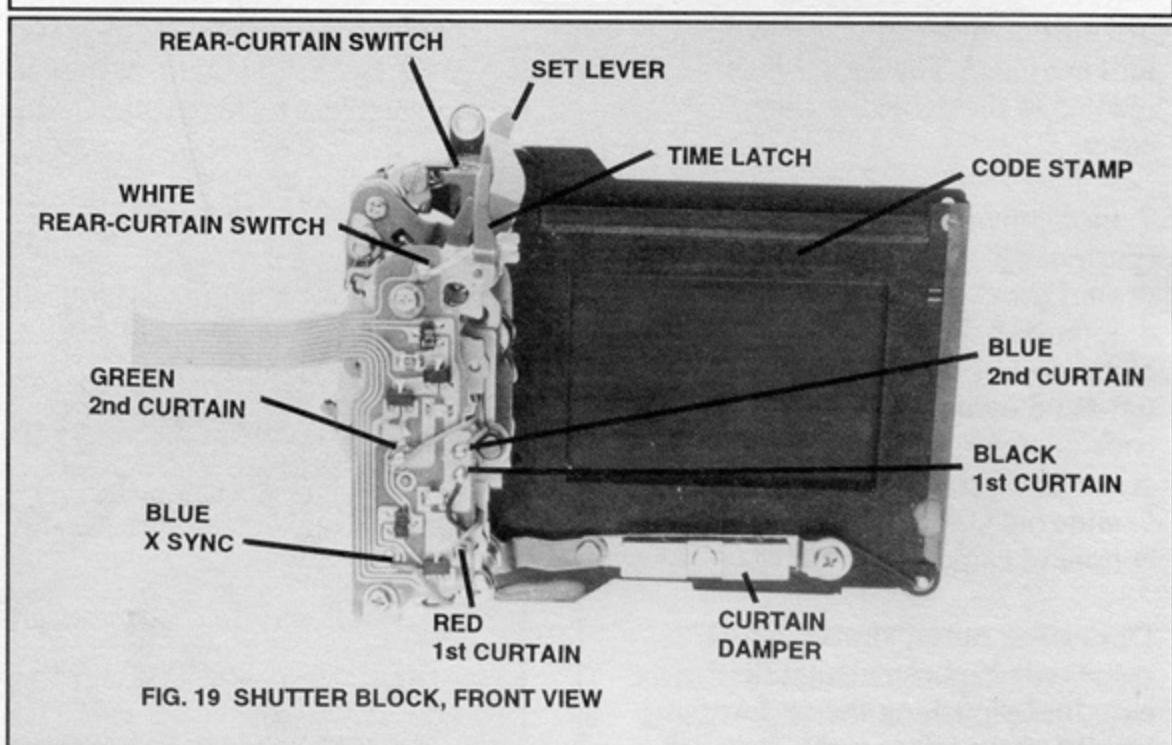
SHUTTER BLOCK, FRONT VIEW
